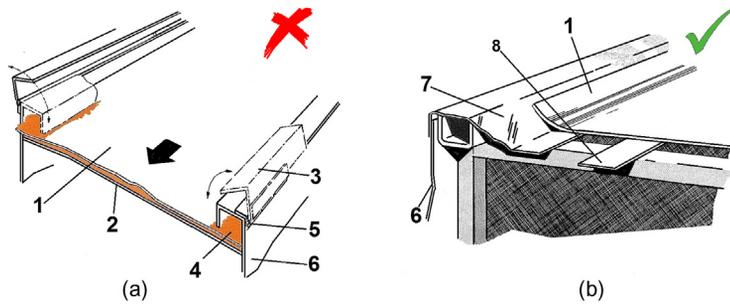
(a) The use of solid plate (2) expanded over the whole top area of the conveyor table to provide support to a belt (1) is likely to increase contamination problems and cause excessive wear of the belt. The non-removable bearing surface (2) for belts cannot be cleaned easily. The conveyor belt should have minimal debris retention, and hence running under the turned-over section of side cladding (overhanging belt edges) is not permitted as the whole surface of the belt cannot be cleaned (4), and the belt cannot be lifted up to allow cleaning and inspection of internal surface and support members. Side guides used to contain product should be capable of being removed. But removable guides also may cause problems because of the possibility of the fastening system working loose. Pivoted covers (3) cannot be cleaned easily, and the use of fixed hinges is not recommended because of the great difficulty of removing debris and microbial slime from between the hinge segments (5). (b) The conveyor frame (6) must be designed so that the sides of the belt are turned up to form an integral guide to the belt (7). Besides, this guide cladding can be made removable allowing for effective cleaning. The conveyor belt shall be supported by a minimum amount of carrying surface or bed (8) as required. Rods, slats, rollers or similar supports shall be used where practical (CFPRA, 1983; Hauser et al., 2004b).
